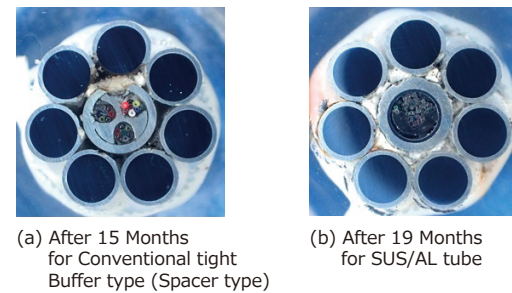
Cross-sectional photo after testing OPGW 85a mm²
